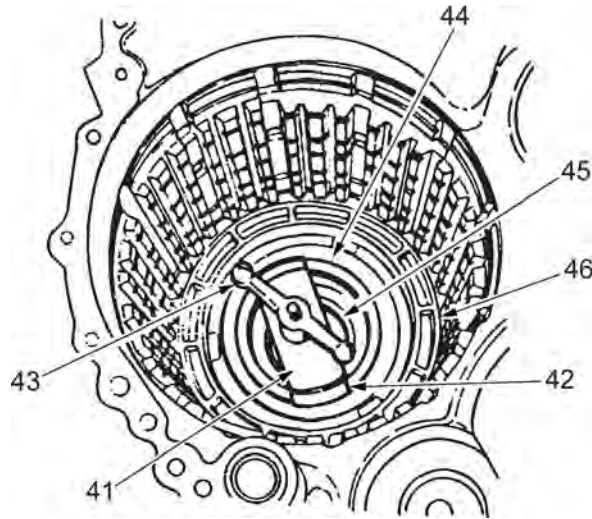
Bar and Stud Assembly and Compressor Installed for Retaining Ring Installation.
